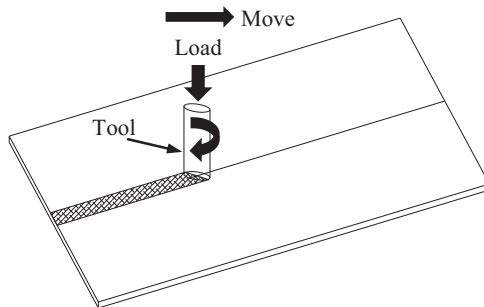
Schematic of Friction Stir Welding Process.
